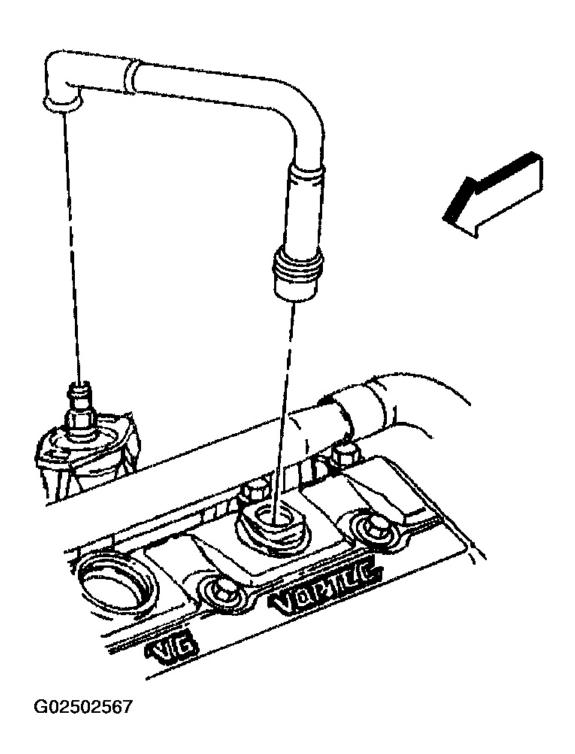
Installing PCV Valve Hose Assembly Courtesy of GENERAL MOTORS CORP.
